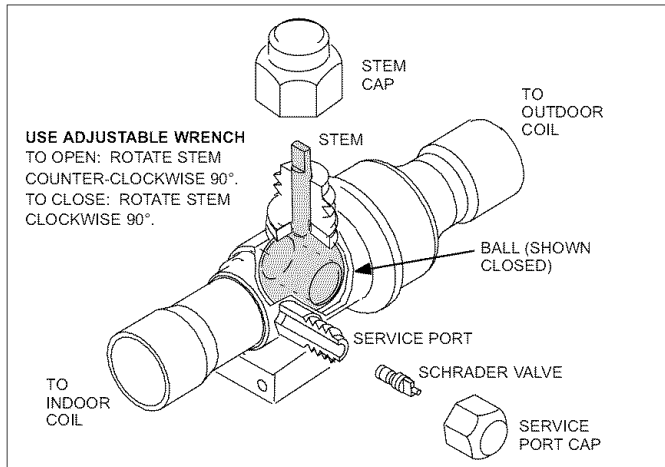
Ball-Type Vapor Valve (Valve Closed)
